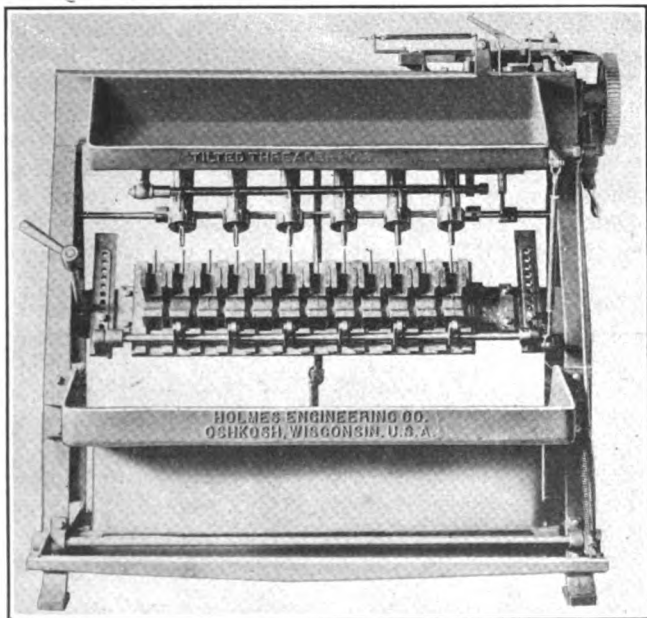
HOLMES TILTED THREADED MACHINE NO. 3
